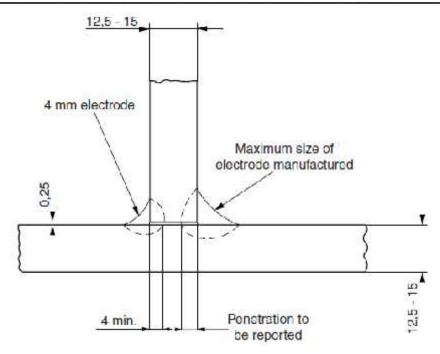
Deep penetration fillet weld test assembly
